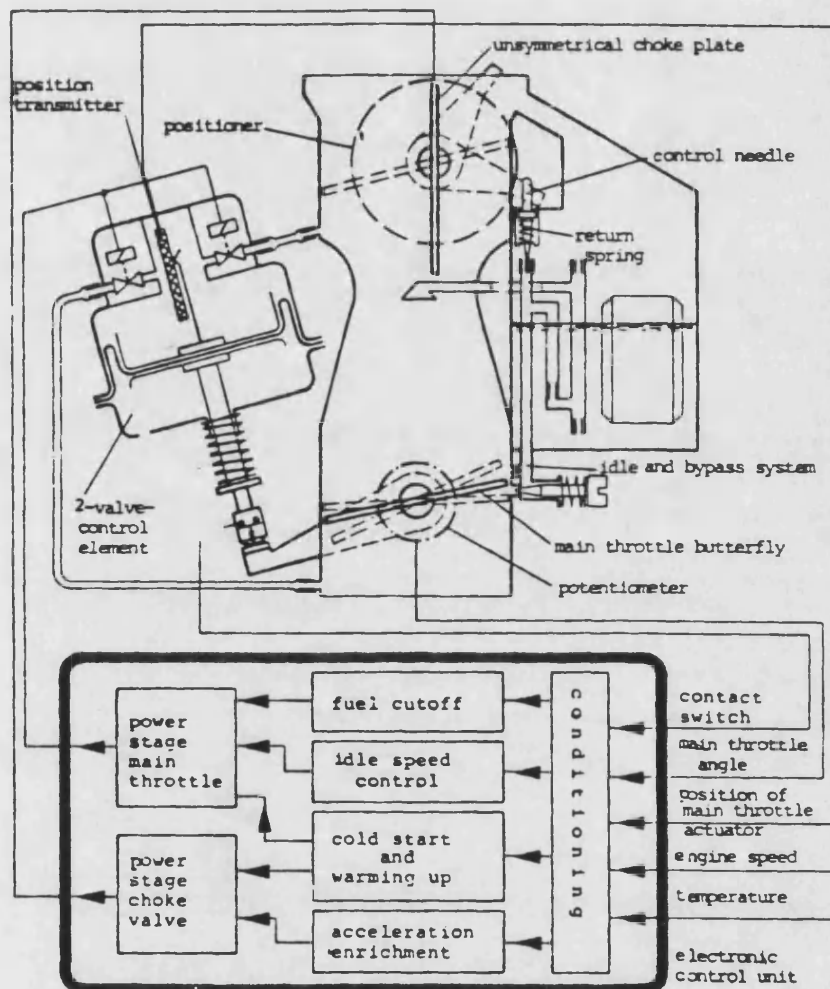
MICRO-PROCESSOR CONTROLLED CARBURETTOR
